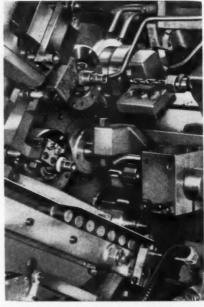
Second operation of machining gear blanks. Note the automatic hopper feed. This is a six-spindle machine. Special spring-loaded spindles are used for holding the castings.
